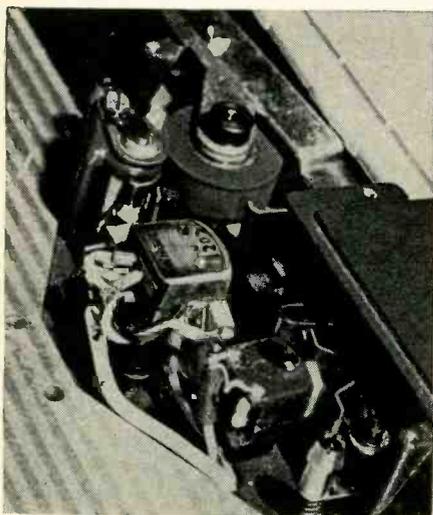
New head in place. Note that pressure-pad assembly has been removed as not necessary with the Nortronics 1202 head.
